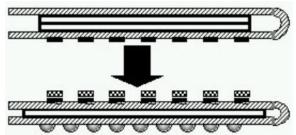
The Two Sections of the Multiple Die Chip-Scale Package Technology Folded and Stacked Package are Joined by a Reflow Soldering Process before or during Board Level Assembly
